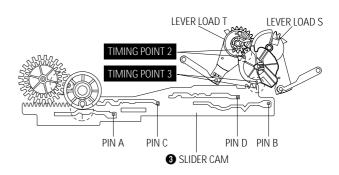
Gear Loading Drive, Slider Cam, Lever Load S, T Ass'y Assembly
